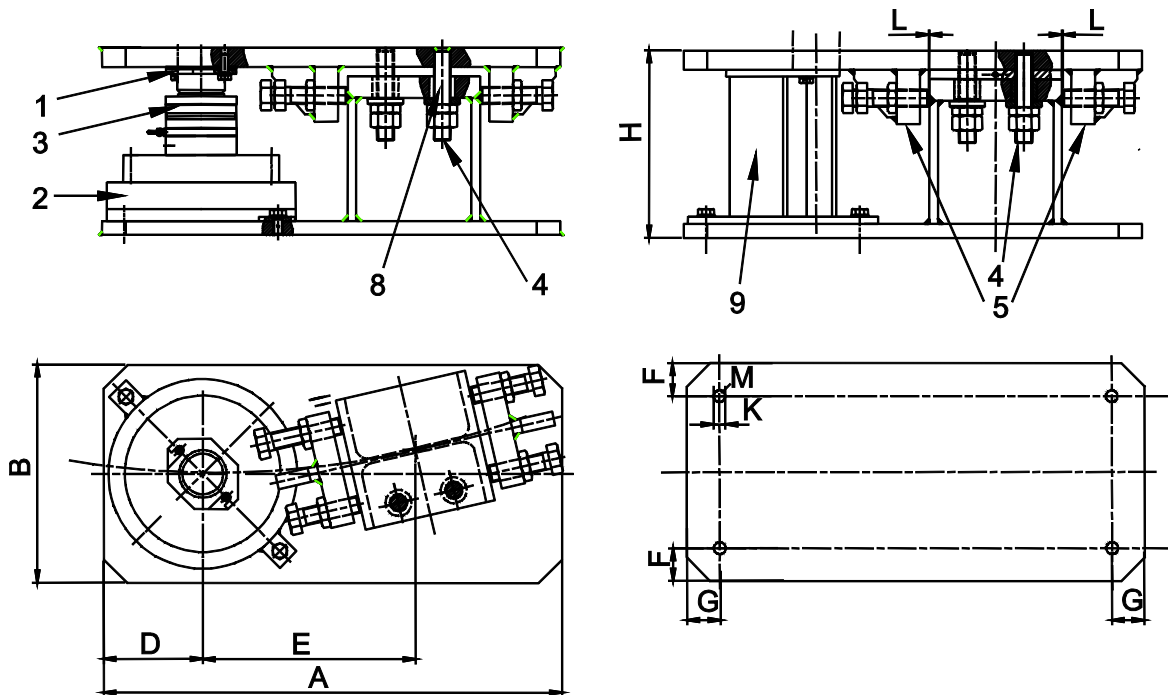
Installation drawing for the compact bearing VKN 47 ... 470 t
